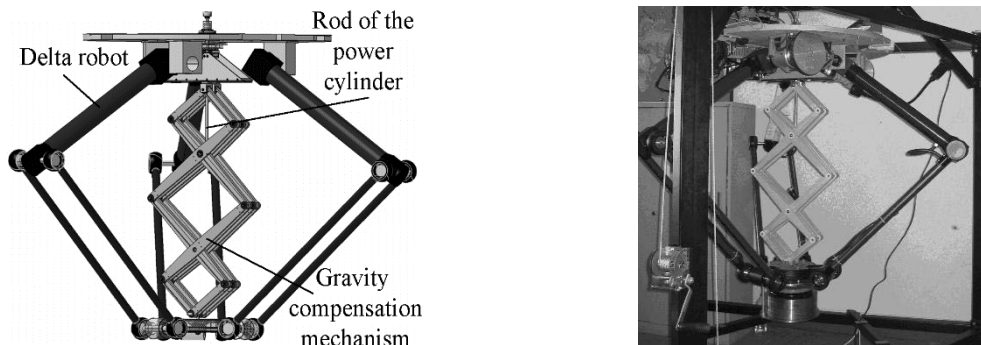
CAD model and prototype of the balancing mechanism implemented in the structure of the Delta robot.
